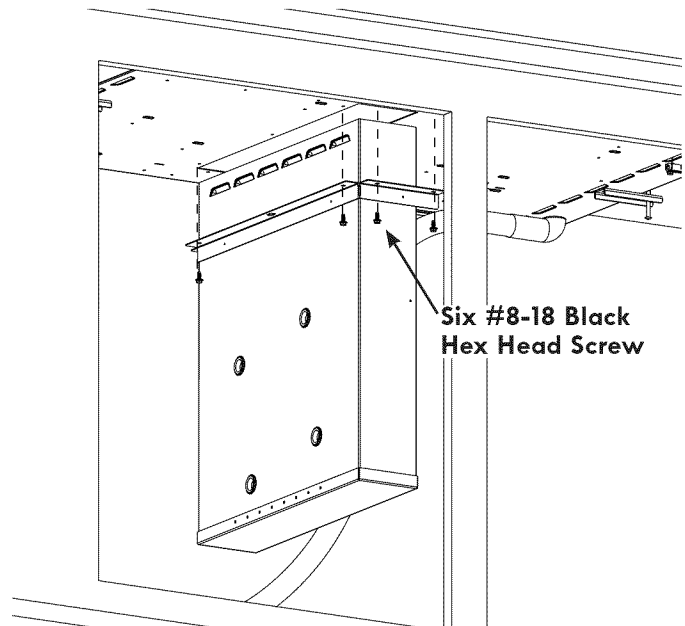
ATTACH PLENUM TO THE COOKTOP
